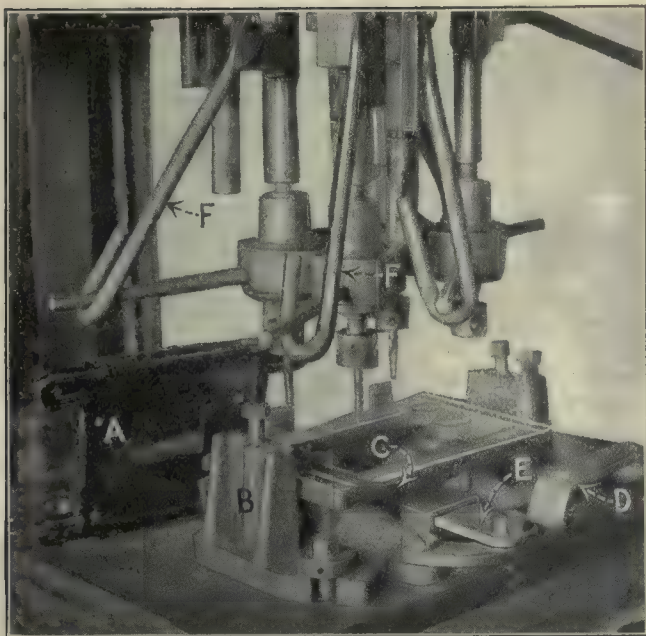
JIG FOR BOTH DRILLING AND TAPPING OPERATIONS
